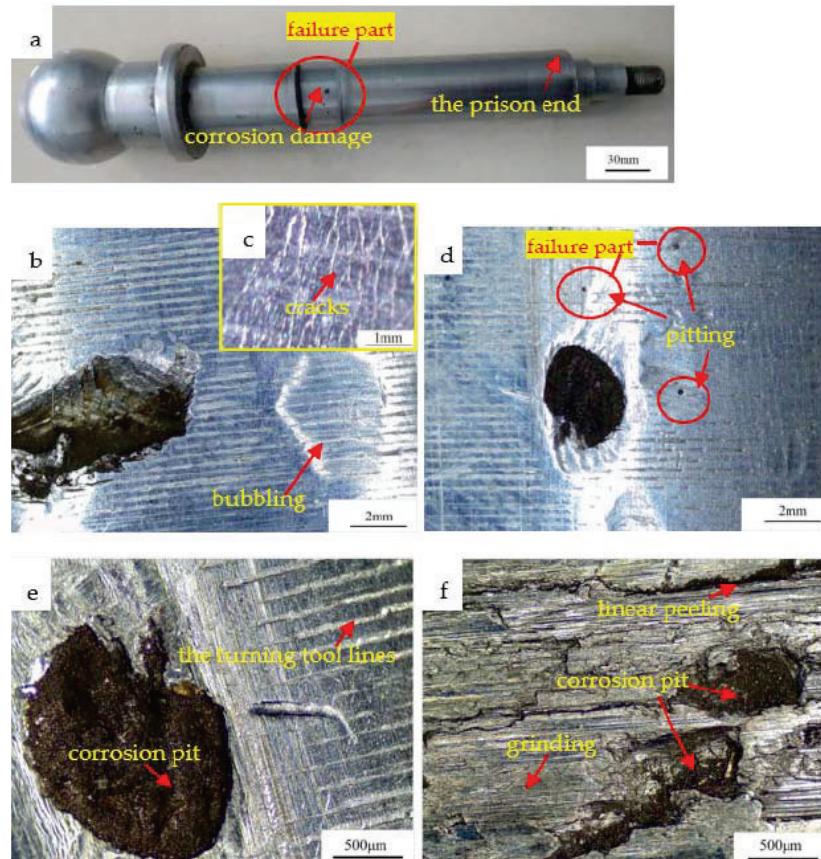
/Rajah 9. Macroscopic morphology observation: (a) piston rod; (b) bubbling of the chromium plating layer; (c) magnified surface of bubbling; (d) pitting; (e) corrosion pit; (f) grinding and peeling/Pemerhatian morfologi makroskopik: (a) batang piston; (b) pembentukan gelembung pada lapisan lapisan kromium; (c) permukaan gelembung yang dibesarkan; (d) pit; (e) kakisan pit; (f) pengisaran dan pengelupasan
